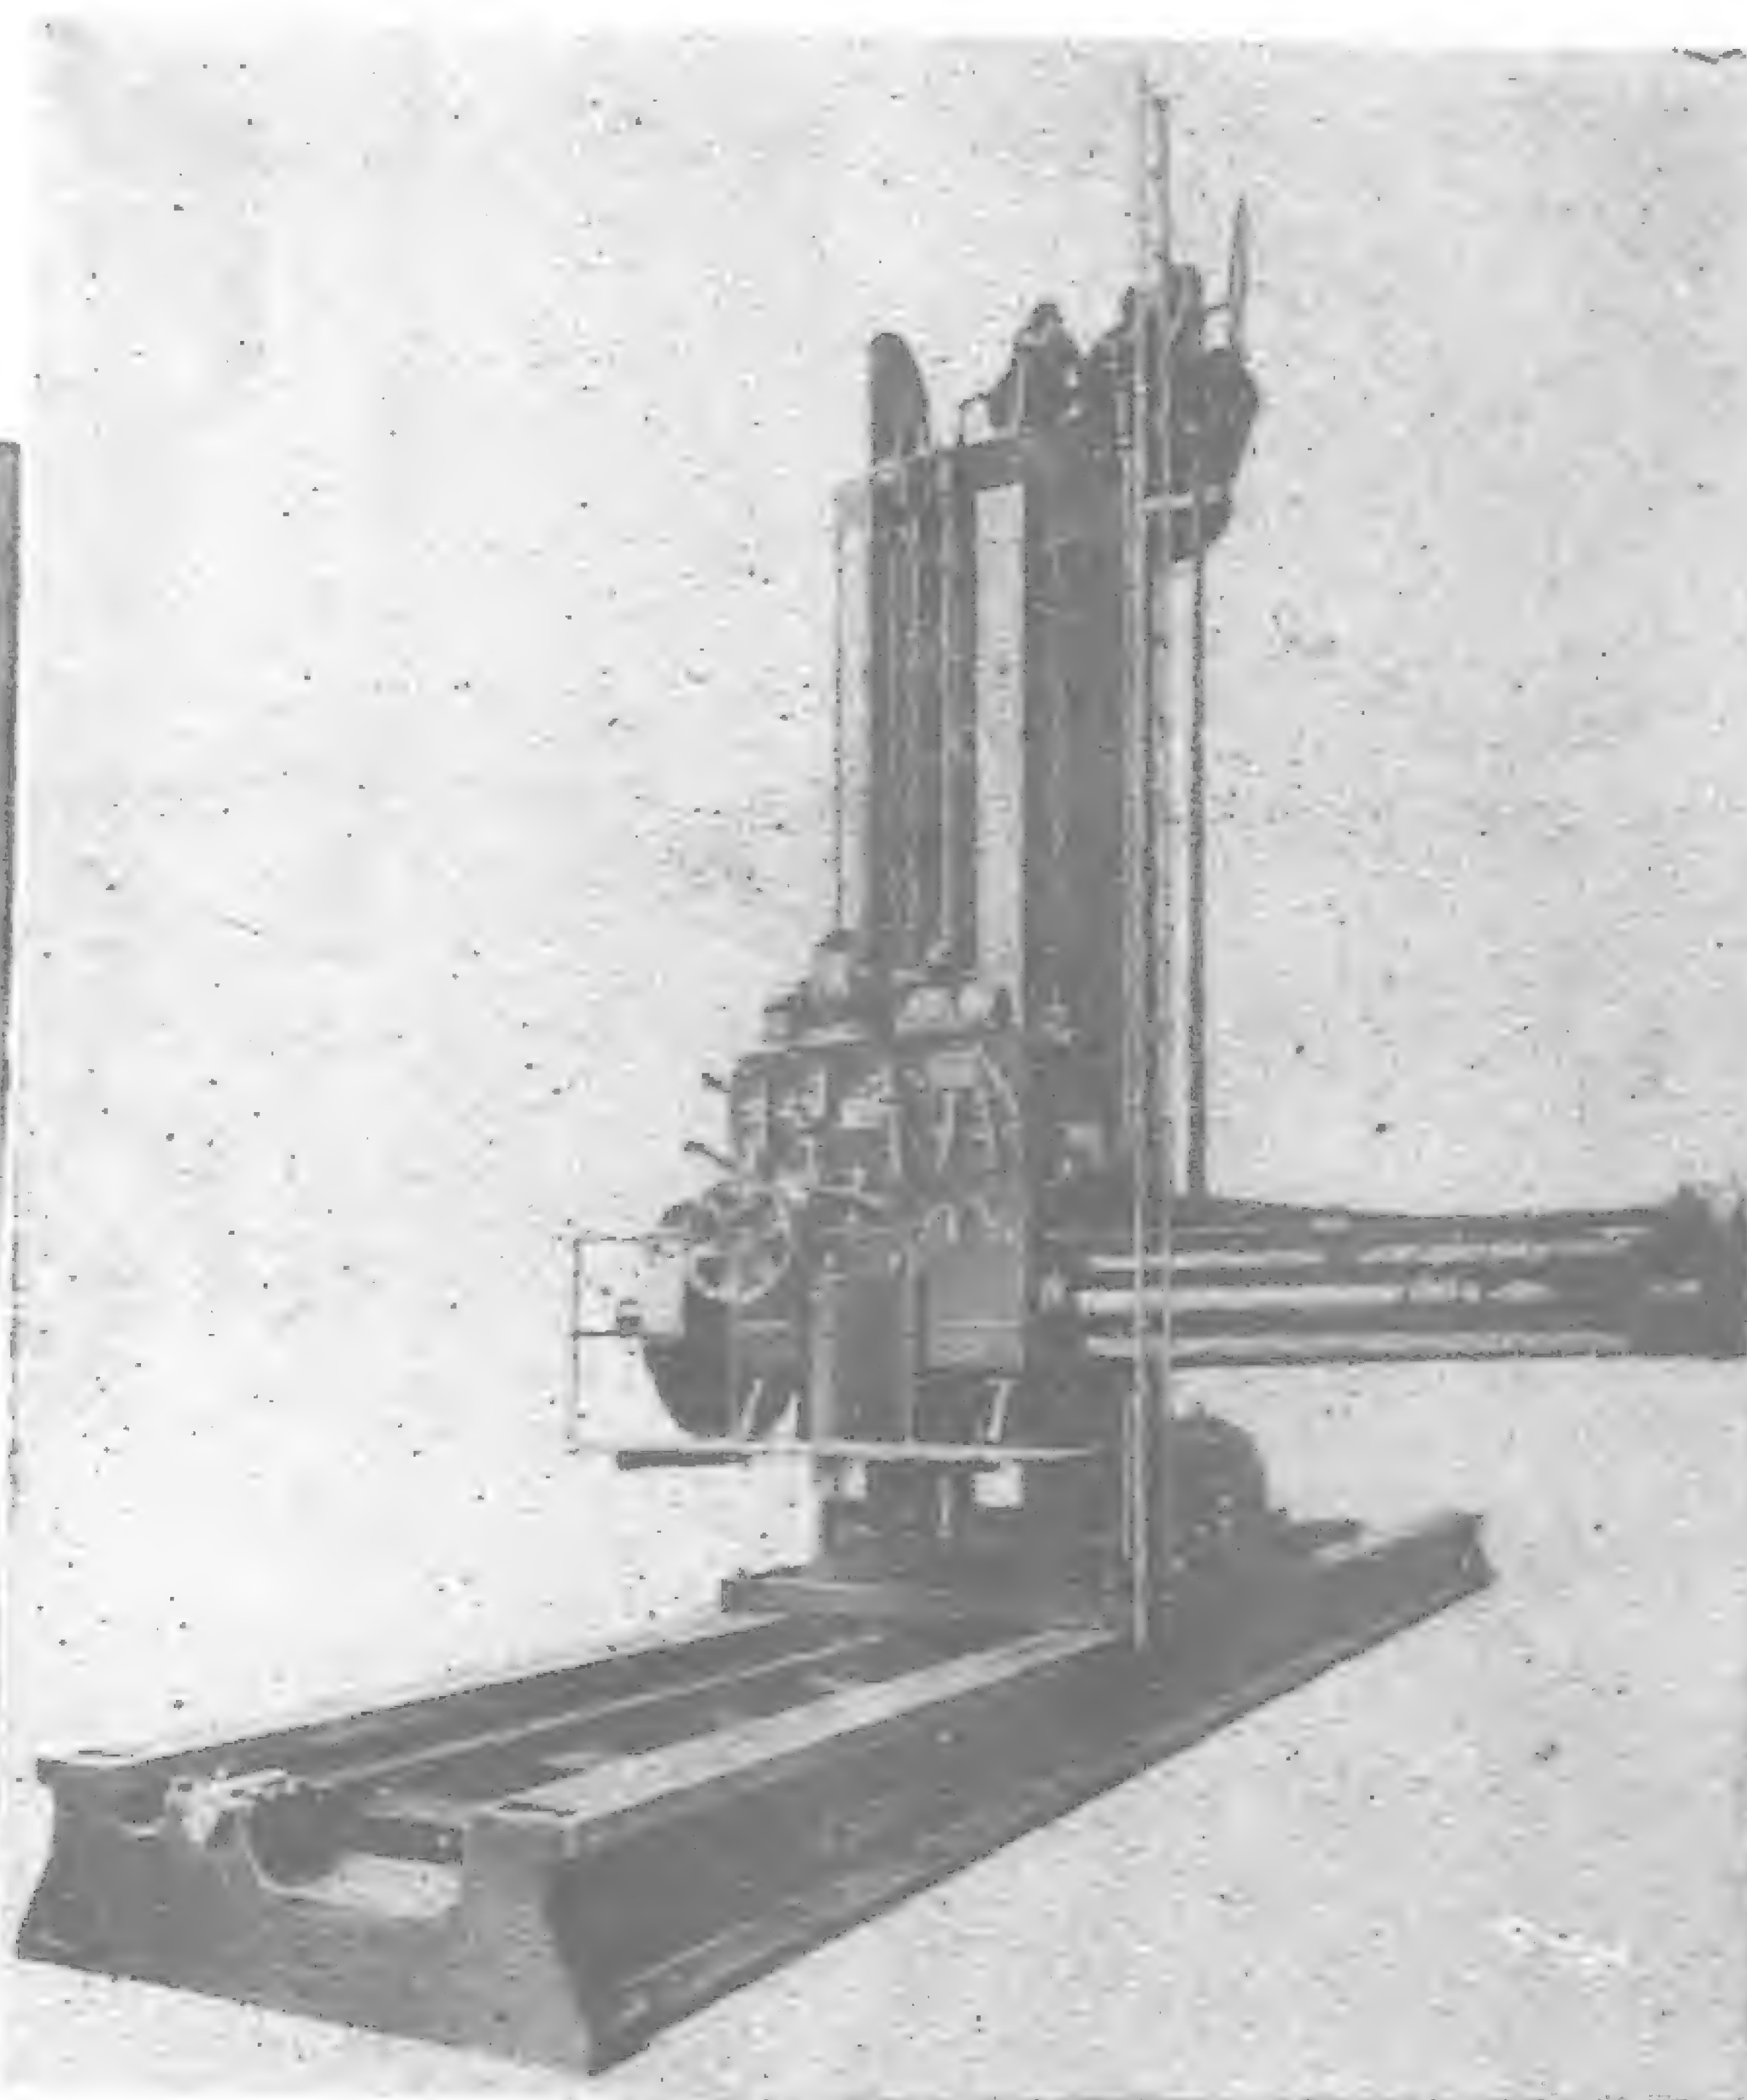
Ikegai 7-in Horizontal Boring, Drilling and Milling Machine G. M. Type Motor Drive.
